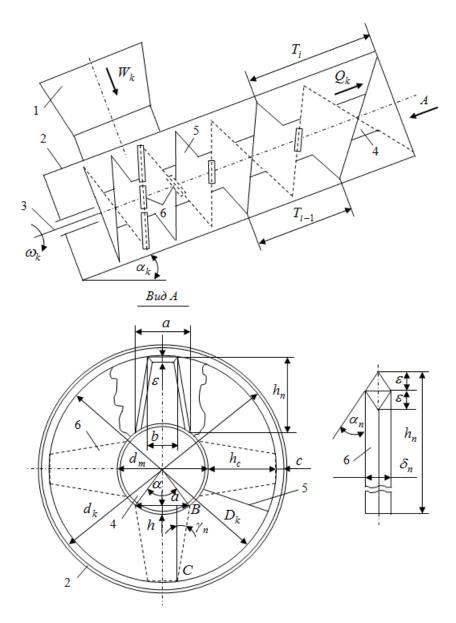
Construction scheme of combined grinding screw conveyor 1 – loading bunker; 2 – guide tube; 3 – drive shaft; 4 – drum; 5 – spiral turn; 6 – grinder knife
